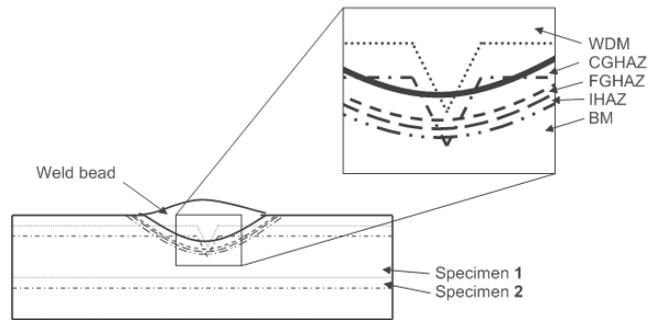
Schematic of weld deposit and specimen cuts
